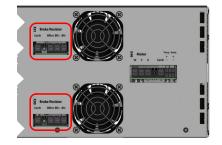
Brake resistor connectors (X90/X91), TSP700-40
